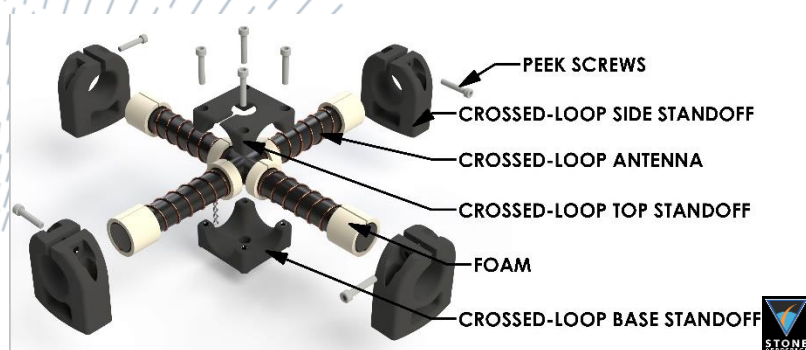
Exploded view of the Crossed-Loop Antenna assembly with component labels
